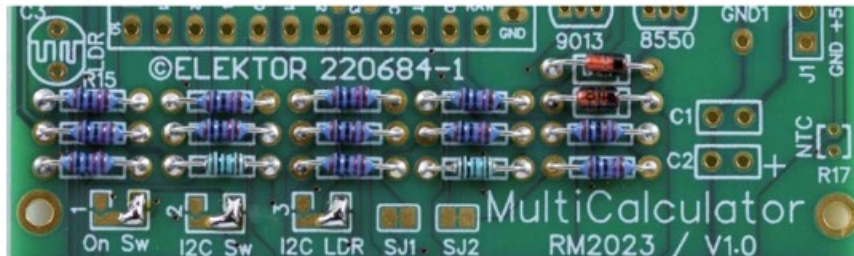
Resistors R1...R14 and D1 and D2 soldered.
